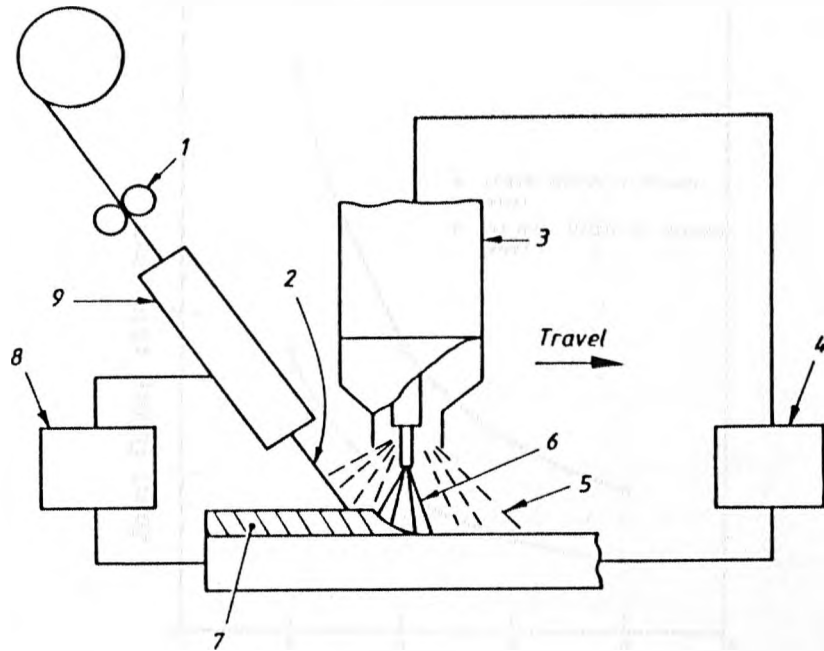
Principle of hot wire TIG welding process.
